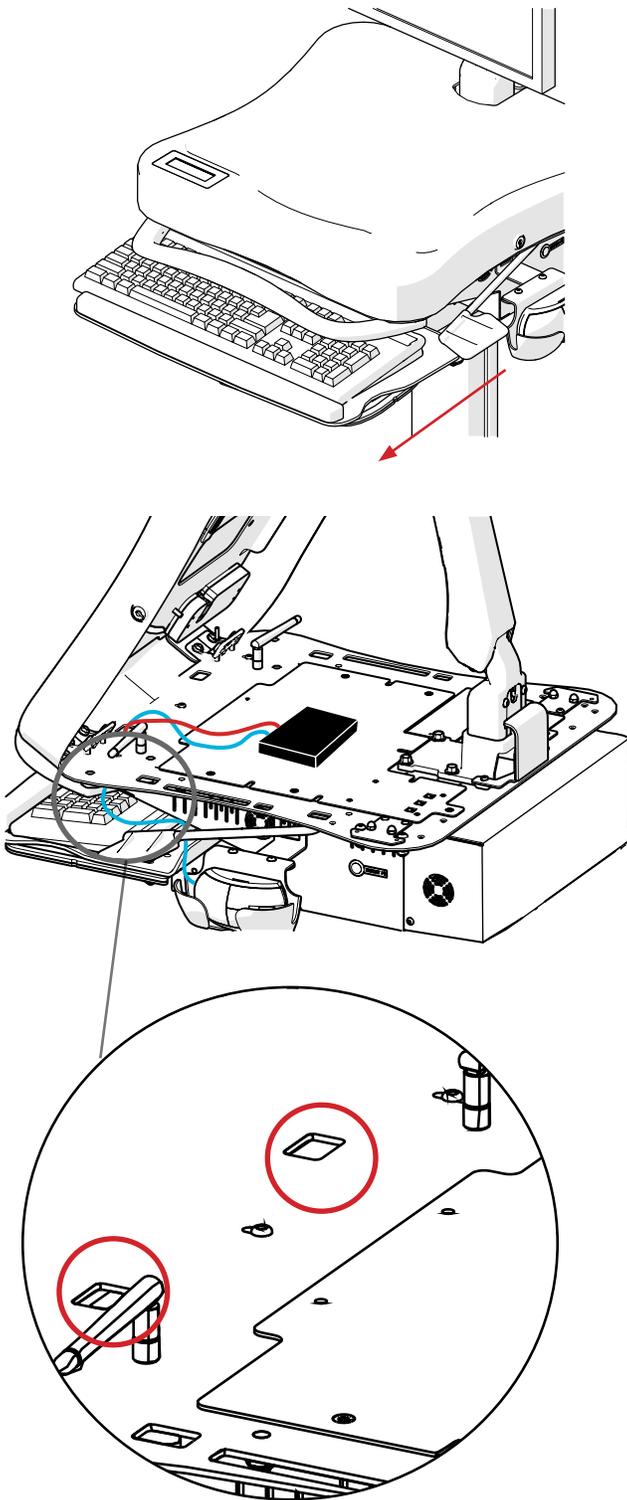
Top view of desk keyboard and mouse cable routing ports
